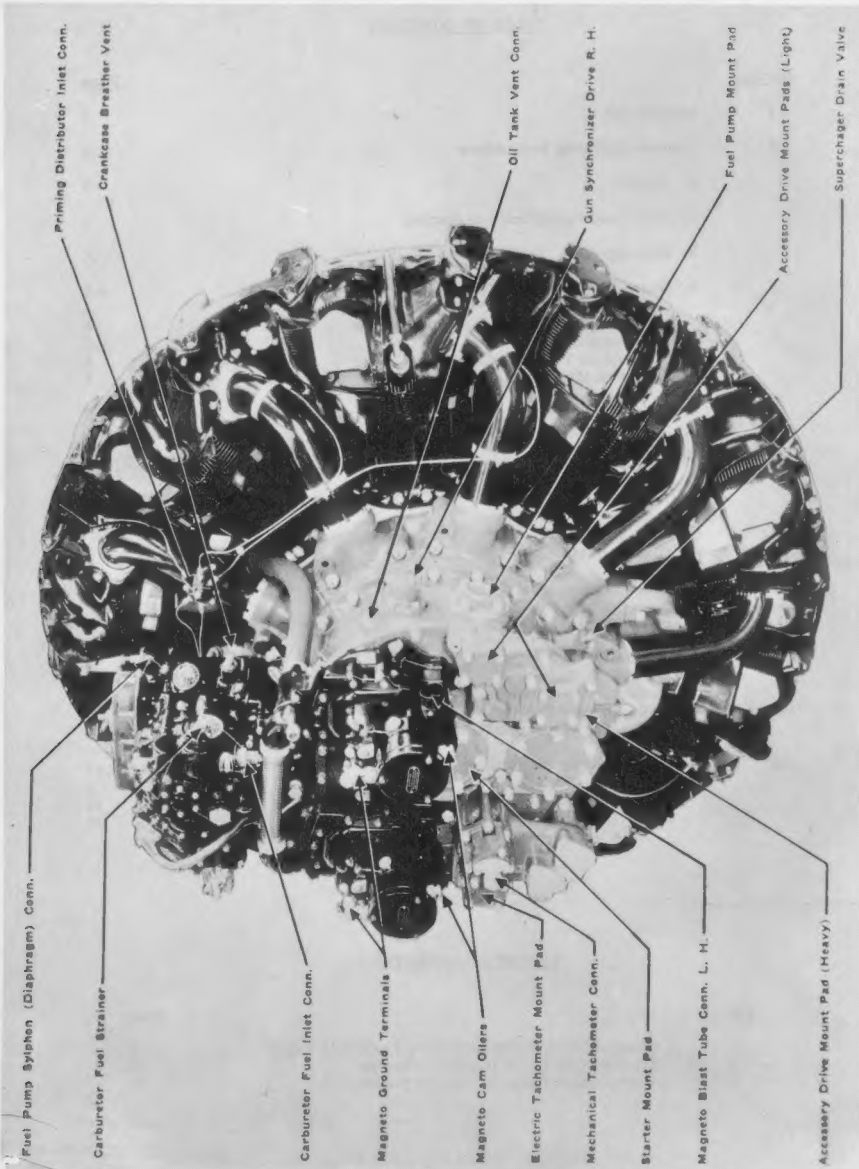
Three-Quarter Right Rear View R-1820-65 Engine
